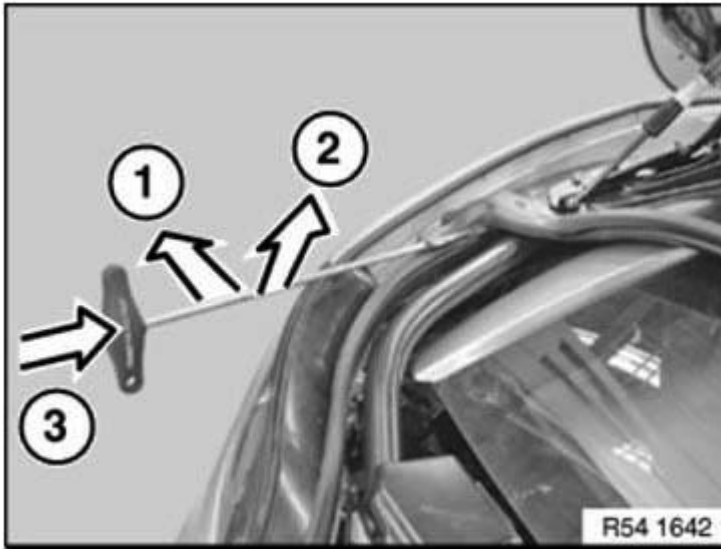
Pressing Tool To Unlock Convertible Top Compartment Lid Latch
